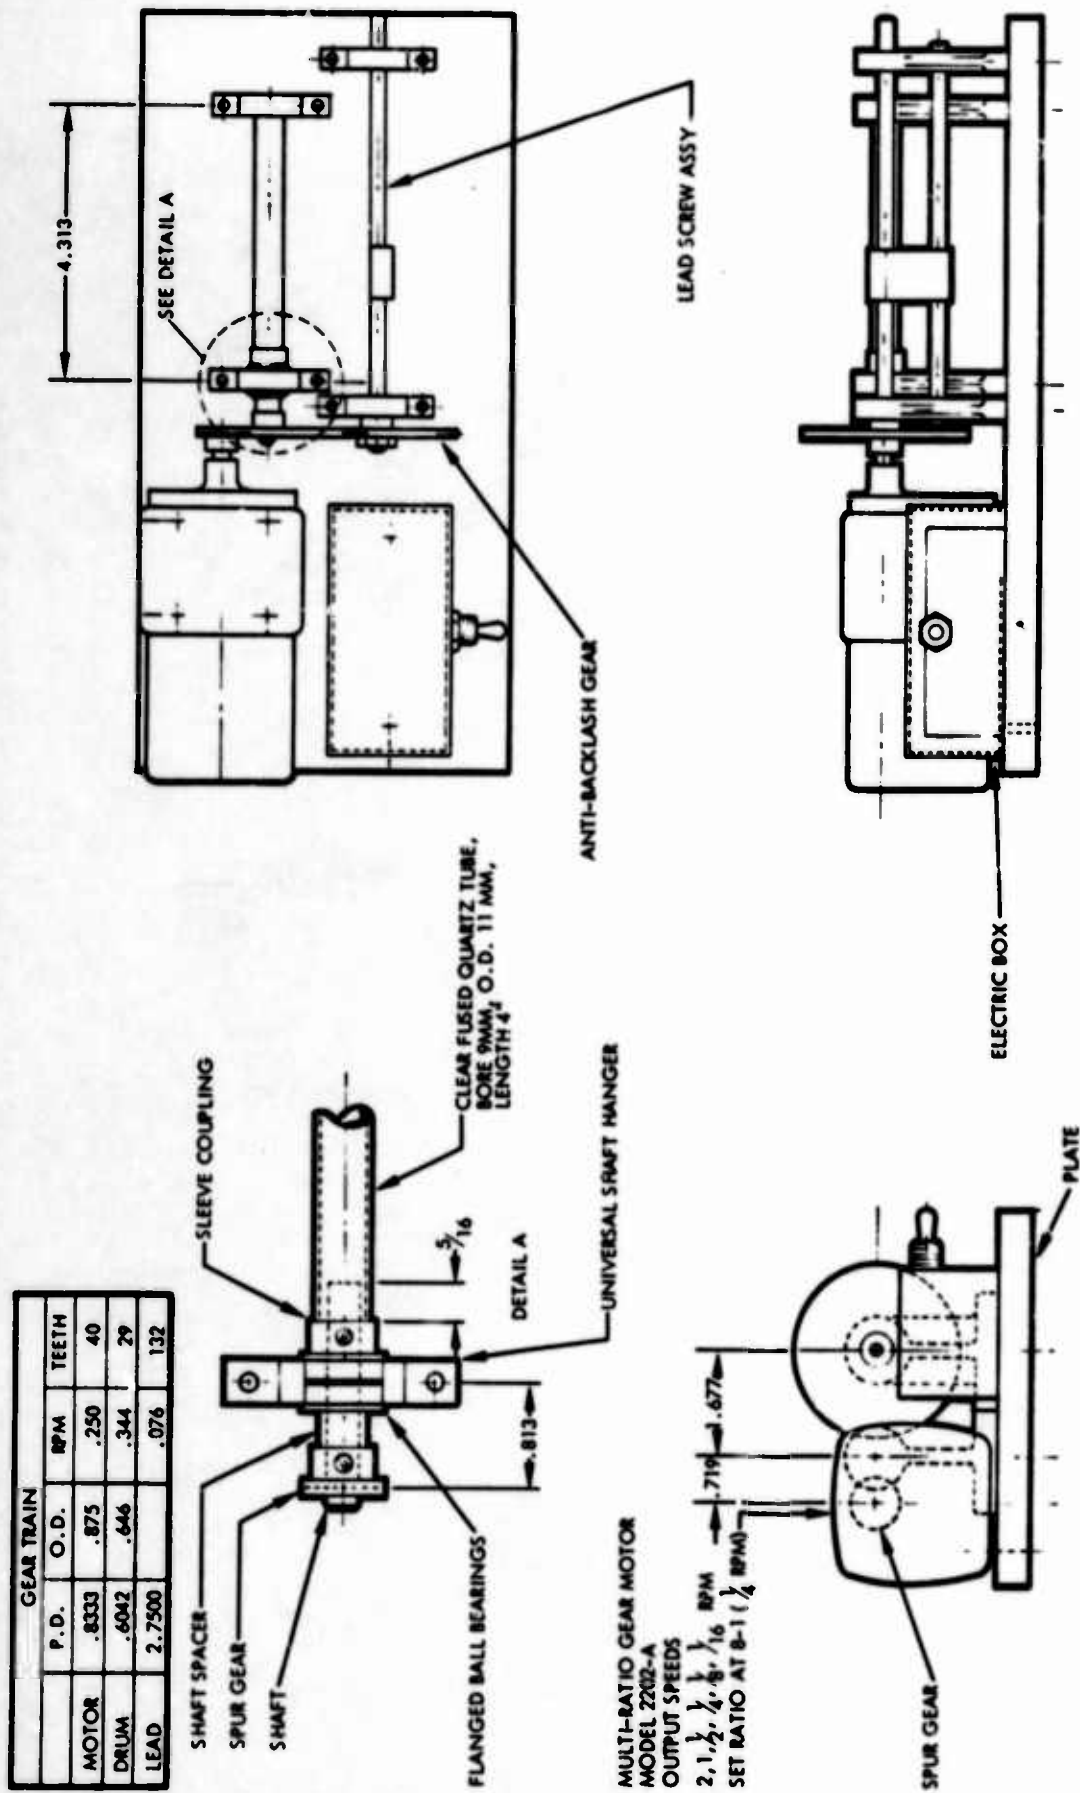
Assembly drawing of Princeton University Particle Analyzer and Traversing Mechanism.
